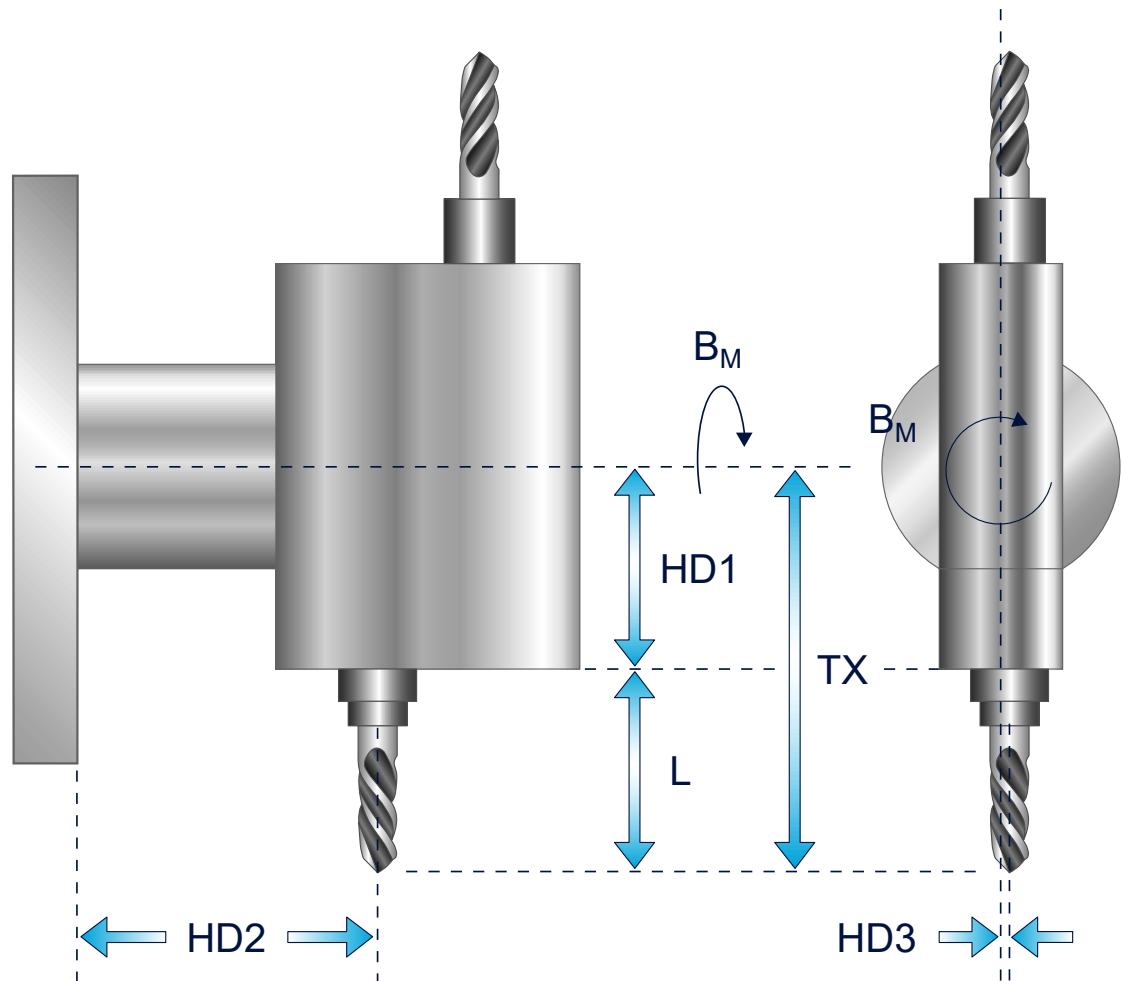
Side view and front view of the double spindle head (bottom spindle)
